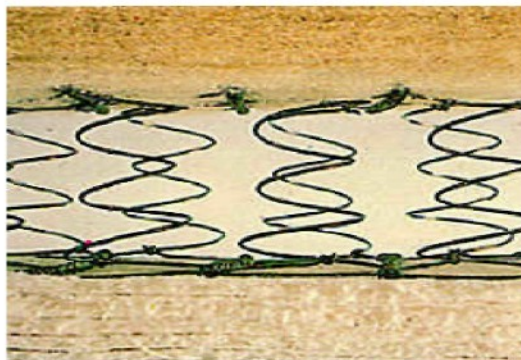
Construction of a Bonnell ® - spring core [www.raumausstattung.de]
